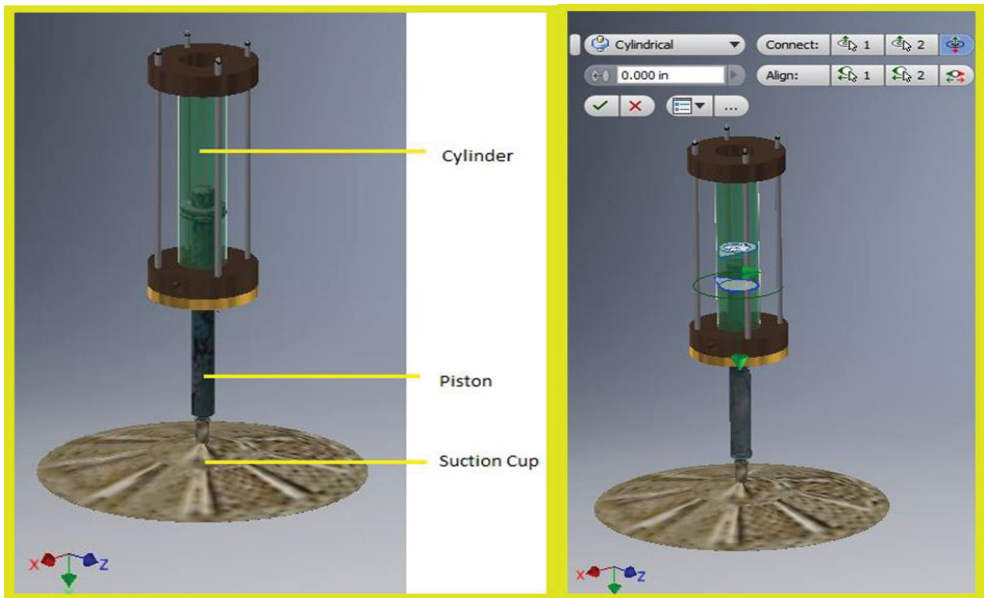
The CAD design of pneumatic Cylinder.
